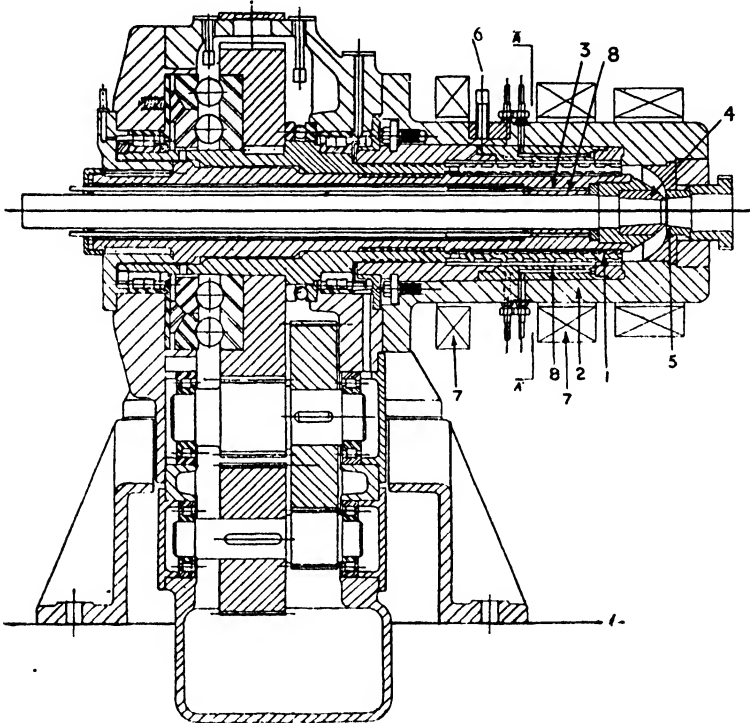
Section through Pirelli continuous extrusion machine for sheathing cables.
